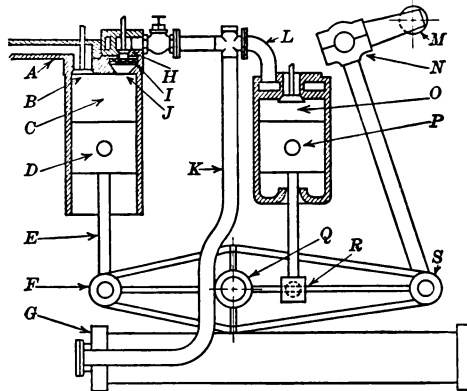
BRAYTON CONSTANT-PRESSURE GAS ENGINE
